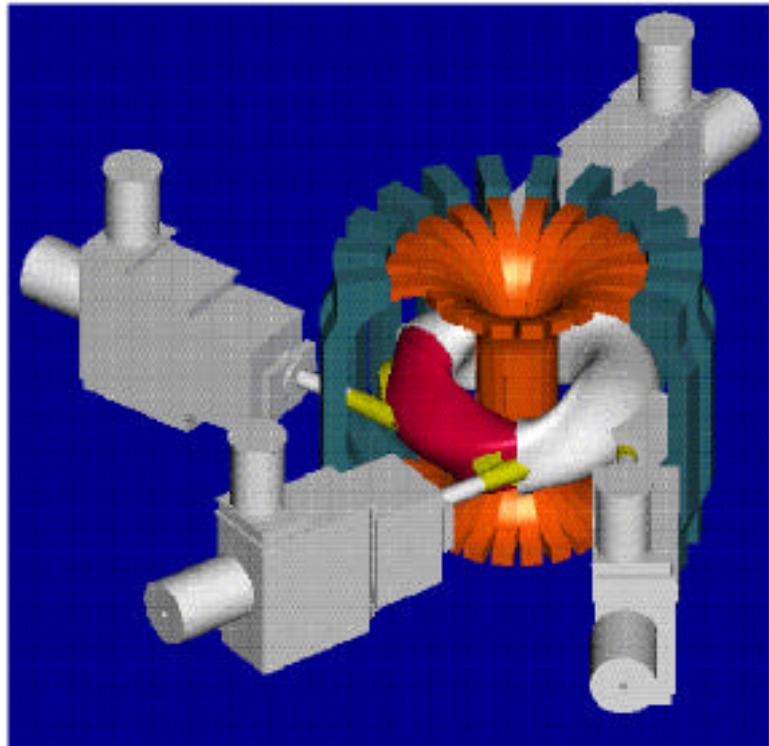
CAD drawing of the NCSX core in the PBX-M TF coils with neutral beams installed.
